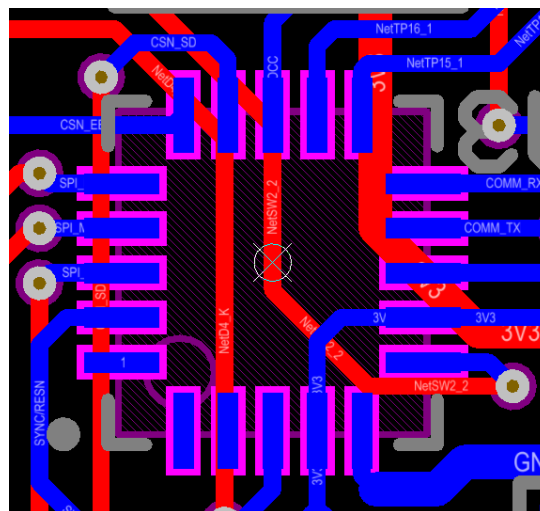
AS72651/AS72652/AS72653 PCB Footprint Recommendation
